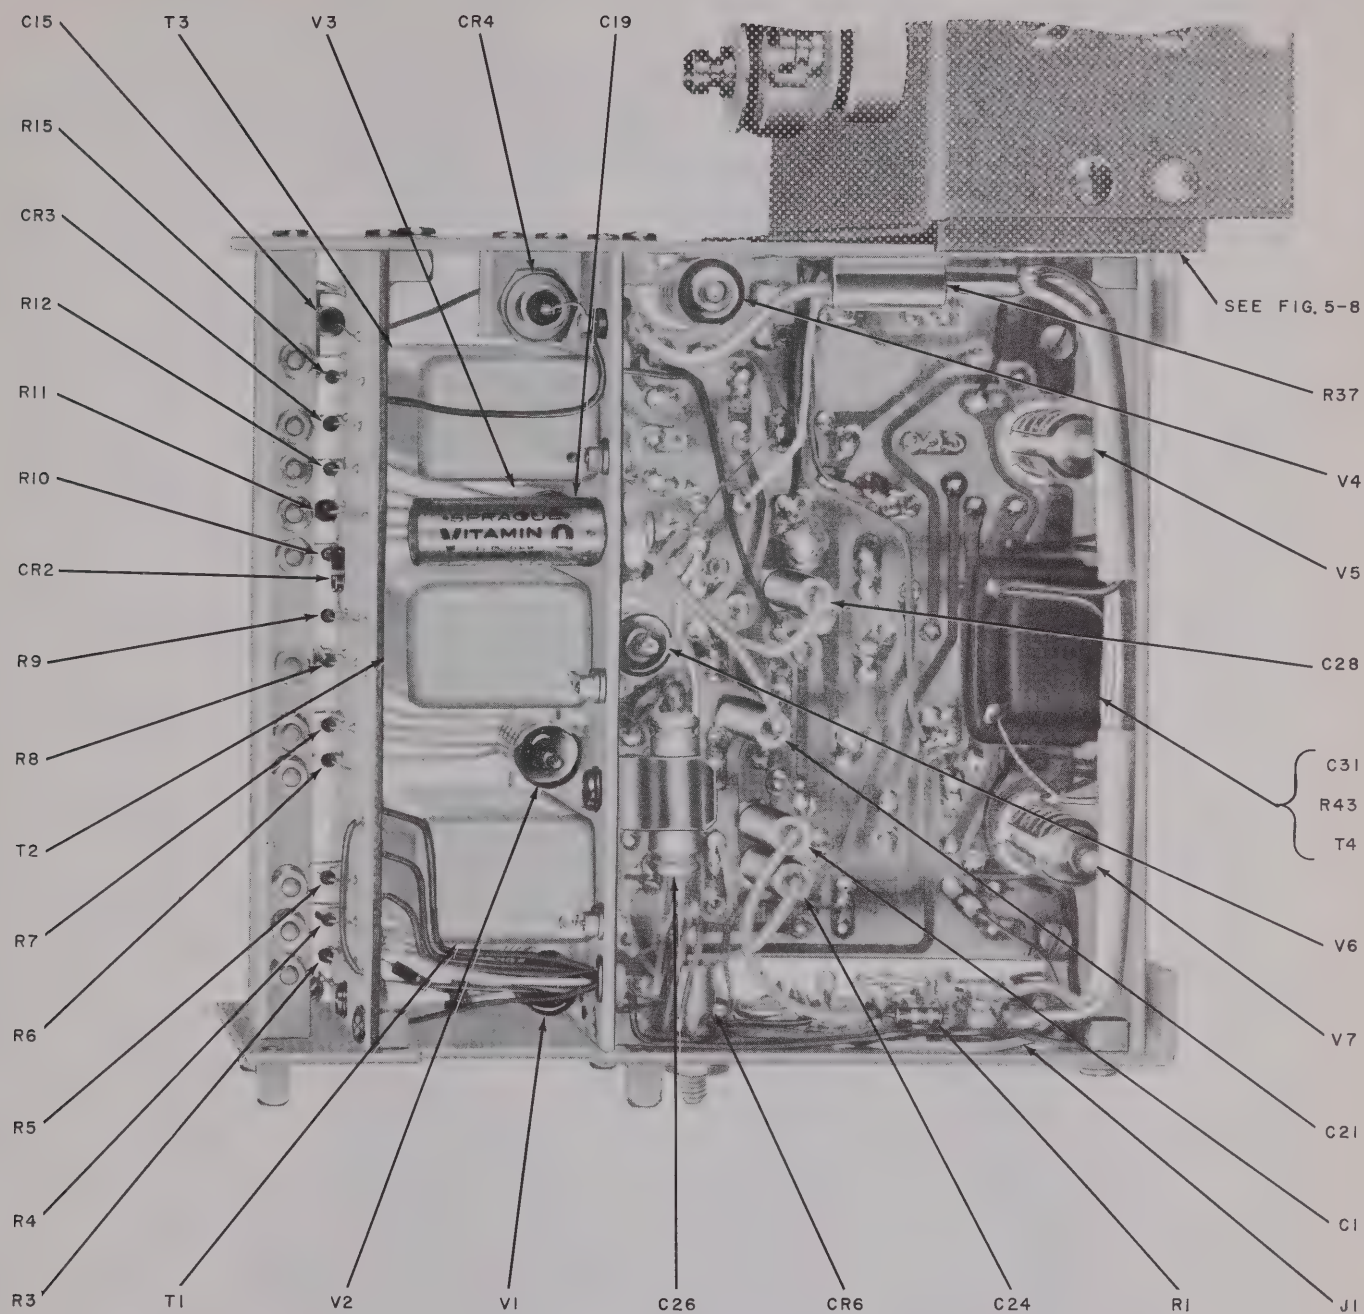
R-34A Receiver, I-f/A-f Assembly, Right Side View
